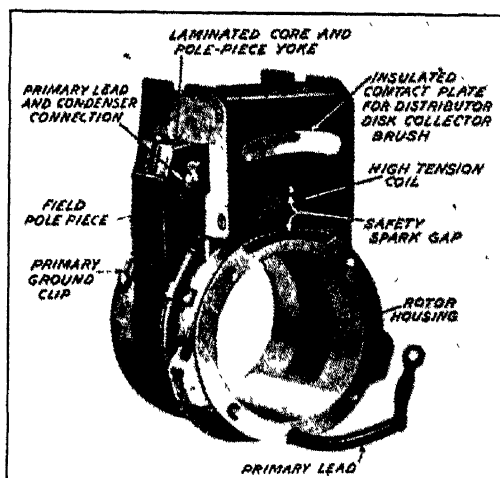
Interrupter-end view of rotor housing and coil of Dixie high-tension magneto showing insulated distributor-brush contact segment and safety spark gap
